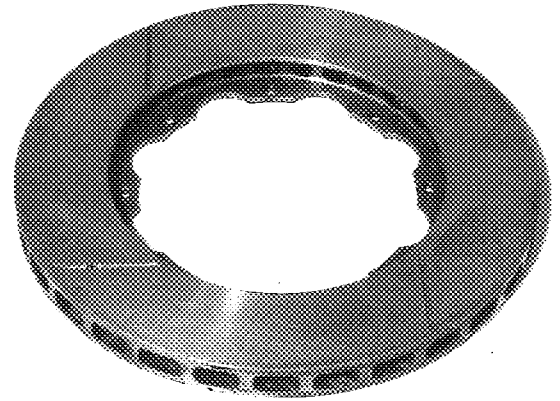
FRONT AND/OR REAR BRAKE DISC TYPE 9
